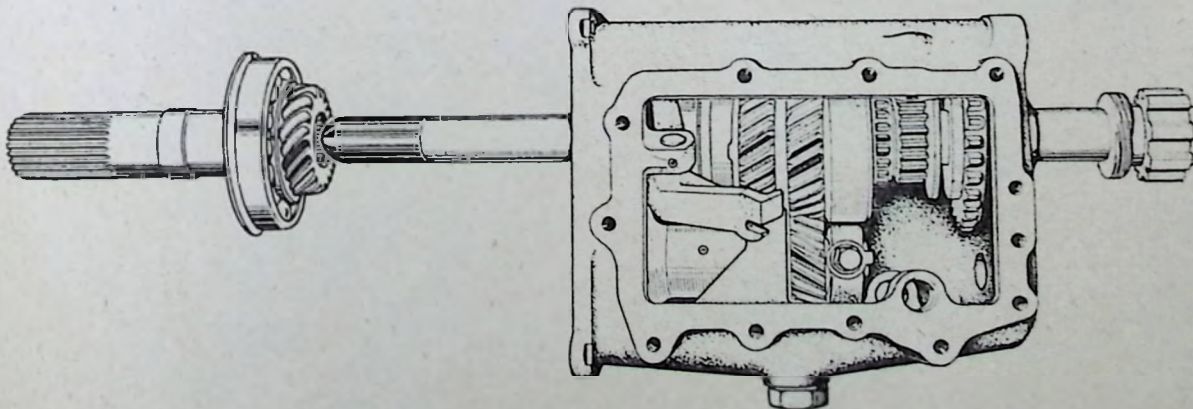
Fitting of stemwheel with oil seal protector on mainshaft.
